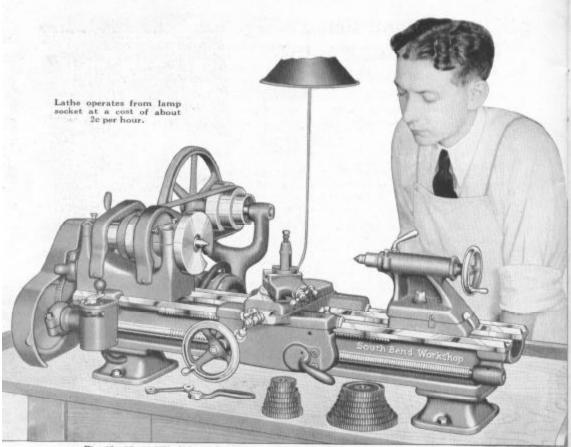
9" x3" "Workshop" South Bend Precision Bench Lathe, with Horizontal Motor Drive and Regular Lathe Equipment
